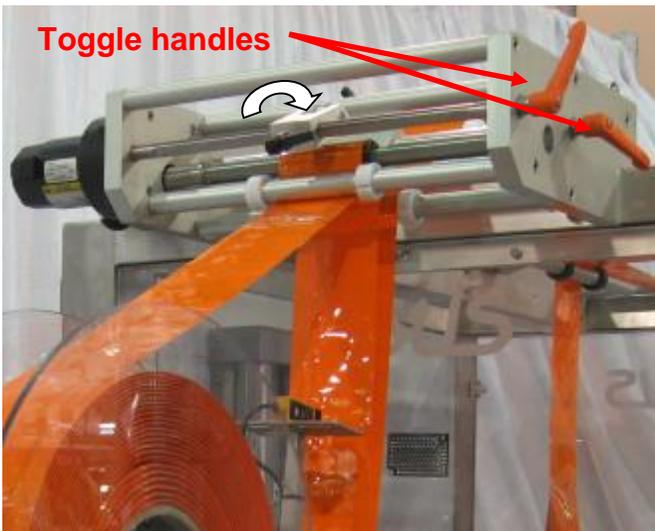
Push down on perf Wheel (if fitted) and tighten with toggle handle. If perf is too deep it may tear/pop open after shrinking; adjust as needed.
